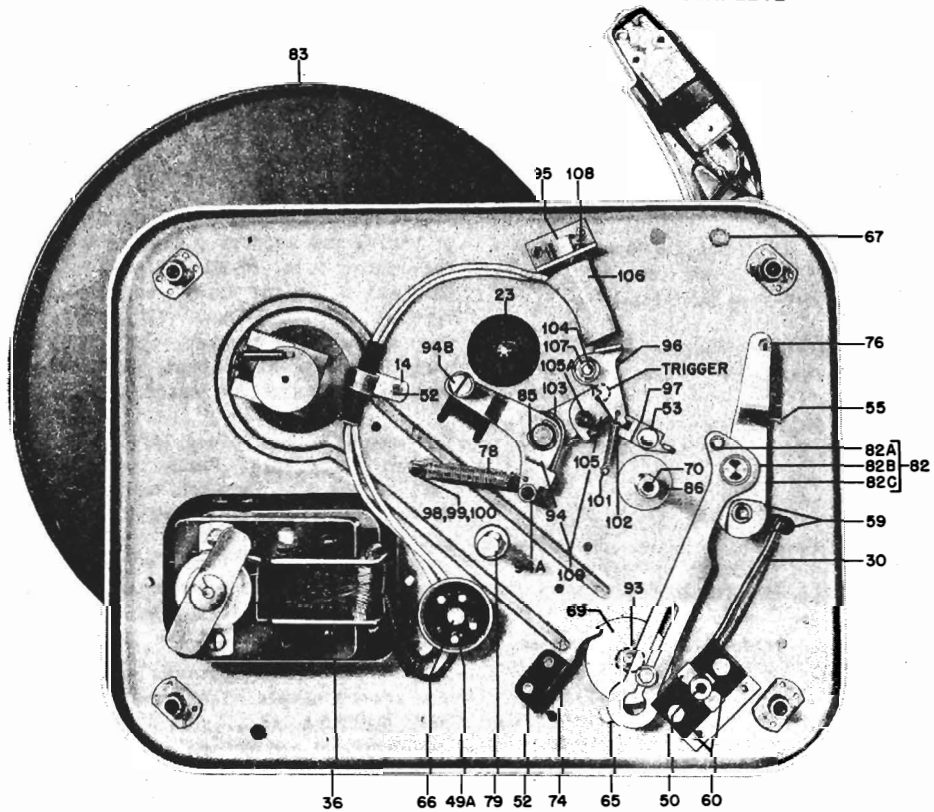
PARTS LOCATION - BOTTOM - PARTLY DISASSEMBLED
